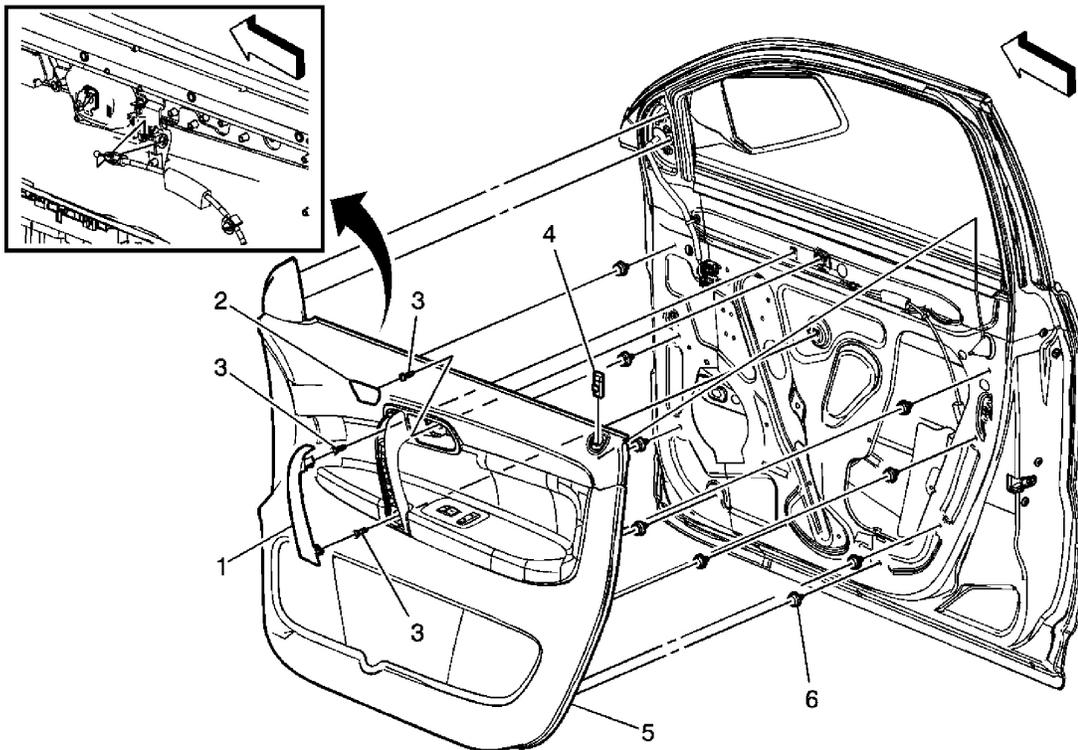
Identifying Front Side Door Trim Panel - Right Side
